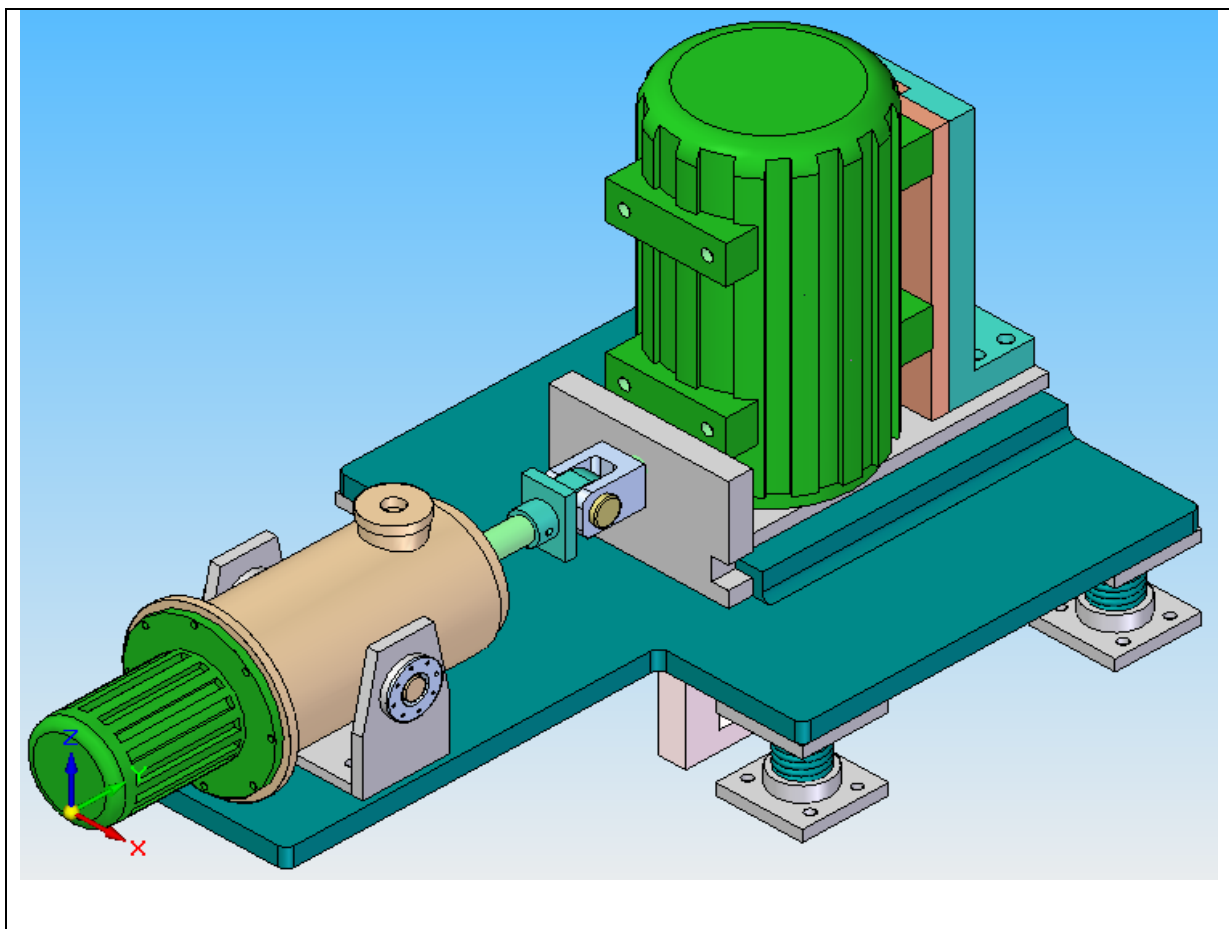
Top structure of friction stir welding machine for joining rails
